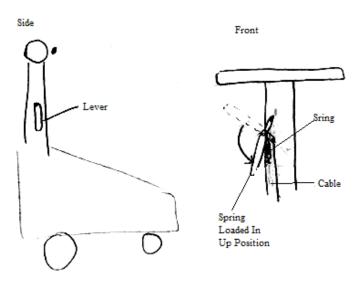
Side View of Attachment/Detachment Hand Mechanism of Design F
